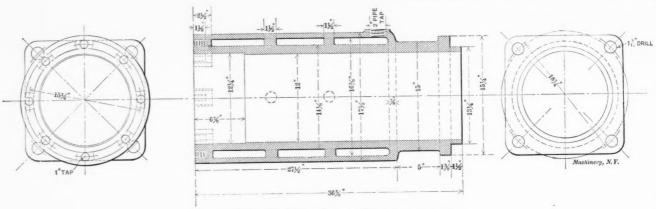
, SHOWING DIAMETER OF GAS ENGINE CYLINDER.
